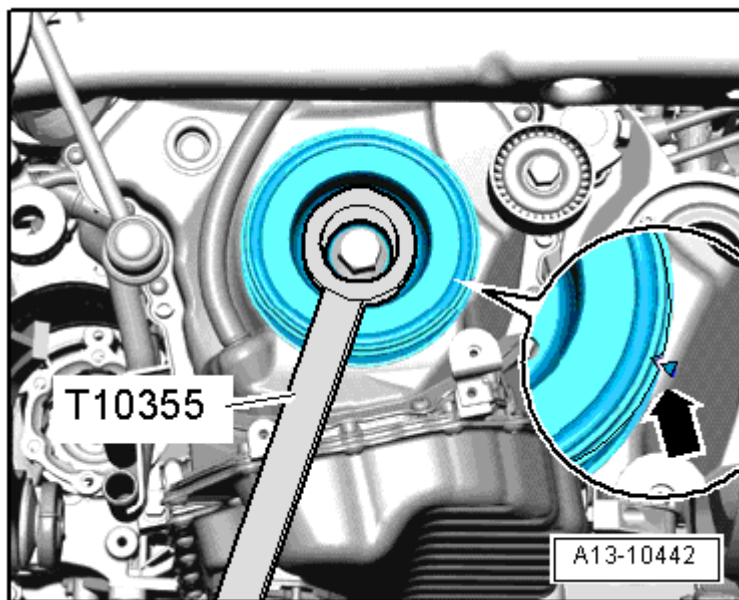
Identifying Vibration Damper Rotated Into "OT" Position Using Counter Hold Tool T10355
